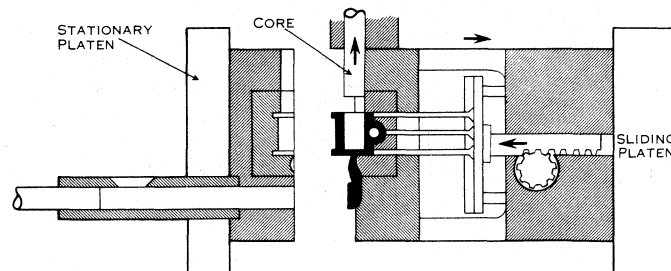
CORES WITHDRAWN AND CASTING MACHINE OPENED AFTER SOLIDIFICATION OF LIQUID METAL
